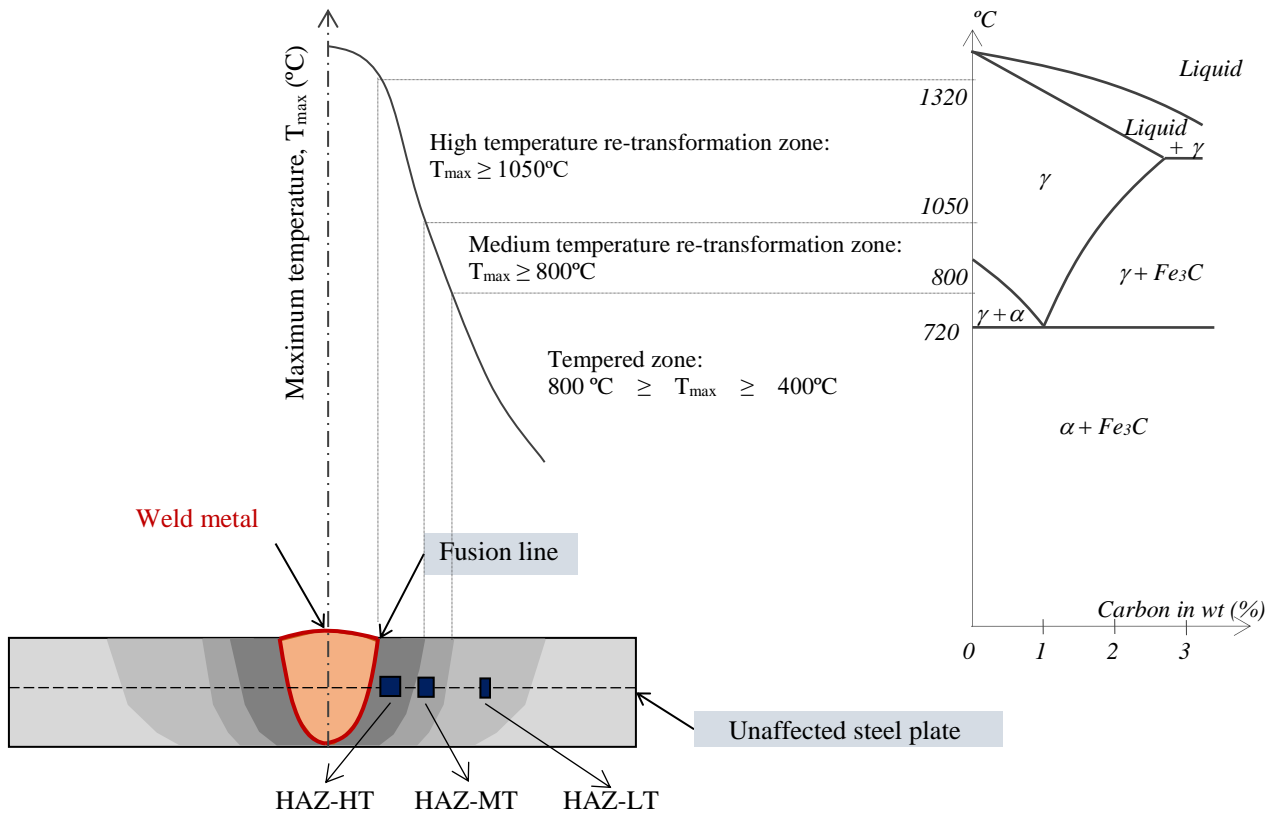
Heat-affected zones in S690 welded sections after a single pass welding
